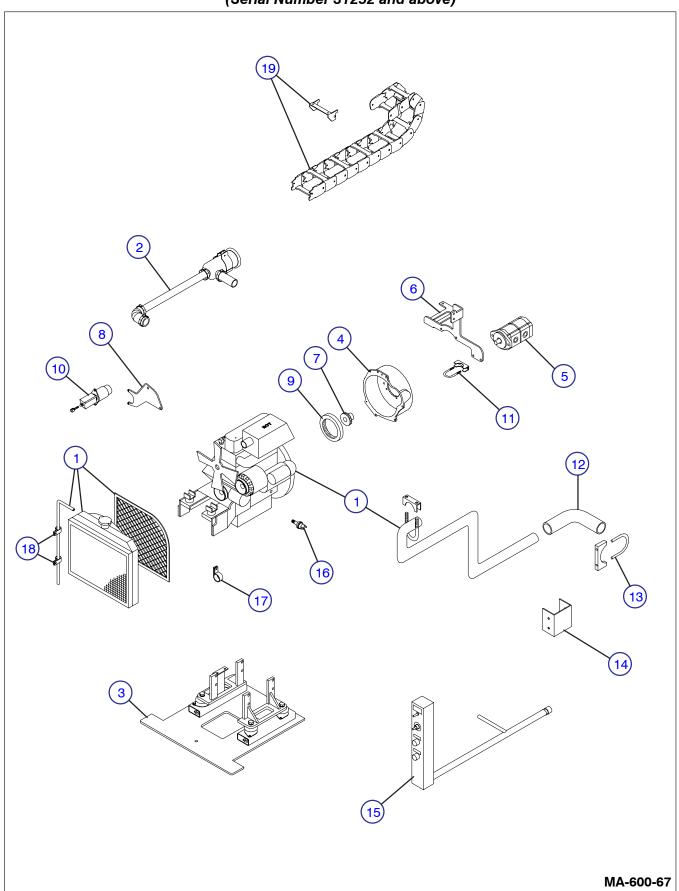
ENGINE AND RELATED PARTS - Kubota Diesel Engine (Serial Number 31252 and above)
